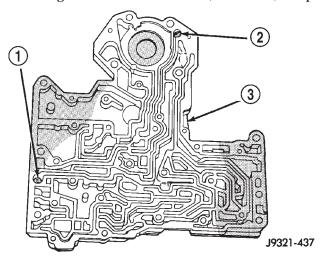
Rear Clutch And Rear Servo Check Ball Locations
